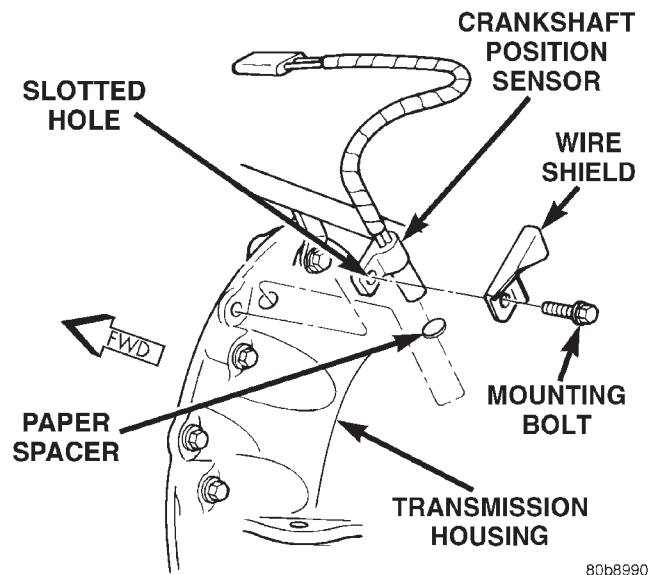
Crankshaft Position Sensor—4.0L Engine
